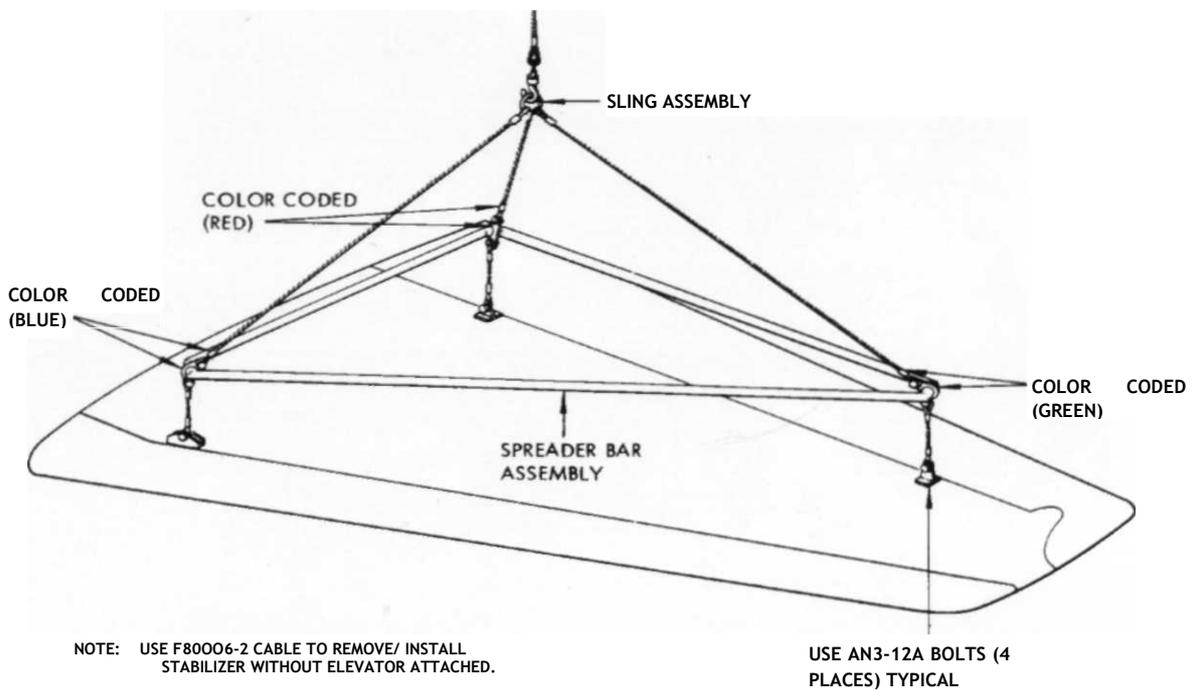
Horizontal Stabilizer Hoisting Sling Installation
